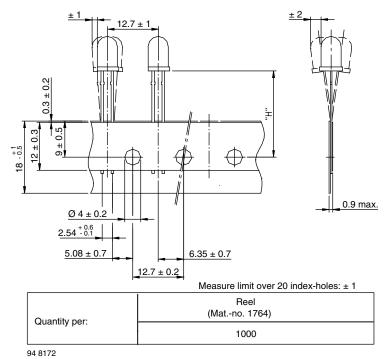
Issue: 4; 19.05.09
